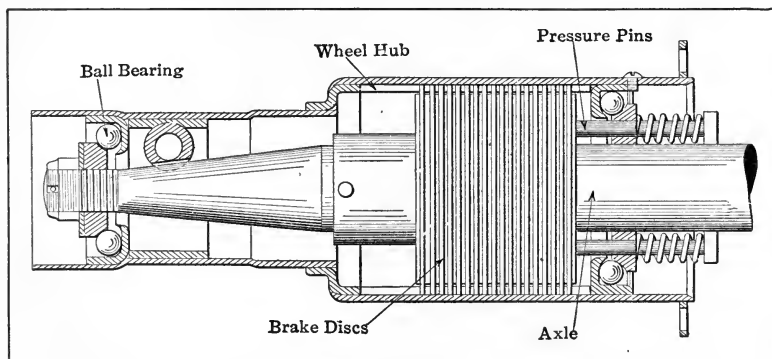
Rear Hub of Metz Car Showing Multiple-Disk Brake.
